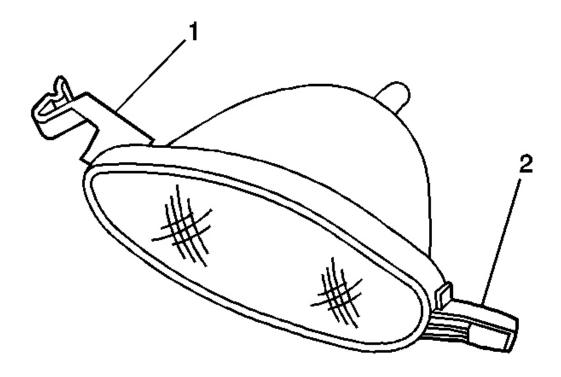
View Of Side Marker Retaining Ear & Stem Courtesy of GENERAL MOTORS CORP.
